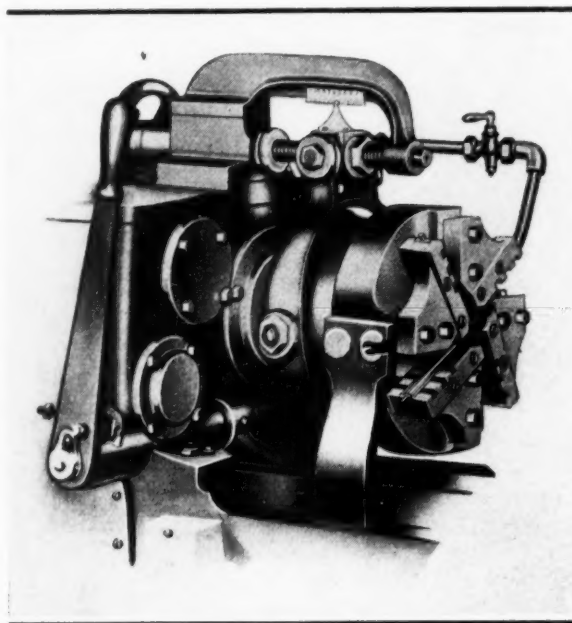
The Setting of the Die-head is Shown by a Graduated Scale
